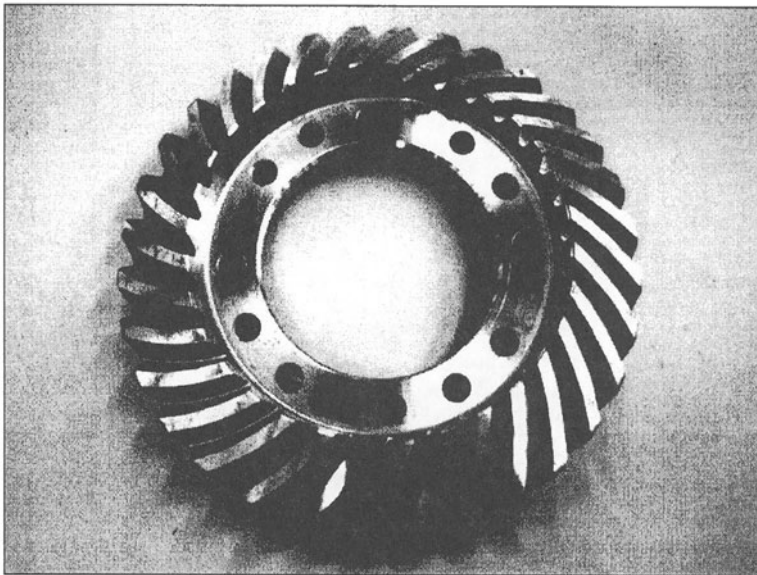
Semi-finished spiral bevel gear (Courtesy of SIAP-CARRARO)
